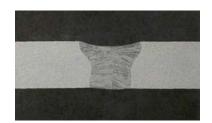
NAC MPC Tube Weld
